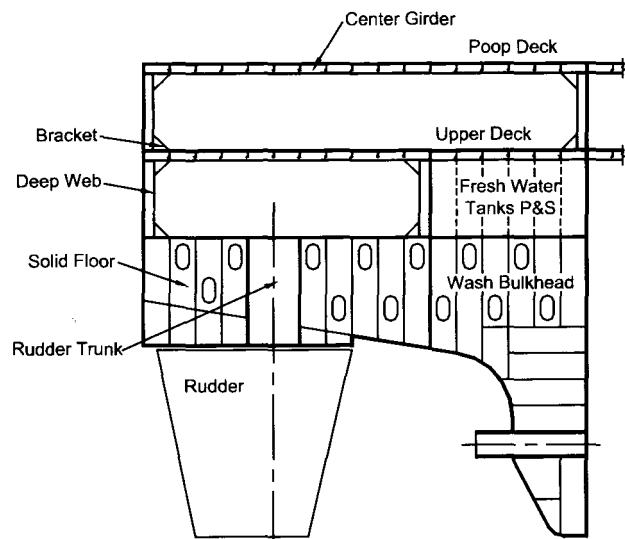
Typical Single-screw Stern Structural Arrangement
